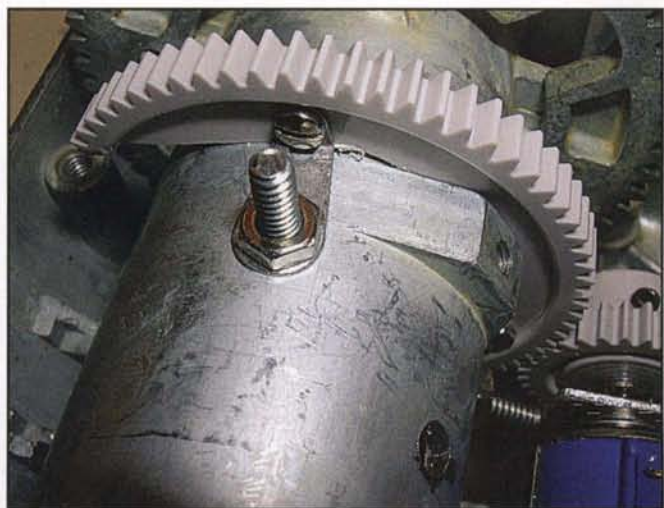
A close-up showing how the gear is secured to the collar and its location between the existing metal gear and the "bump" on the collar. Note the 6-32 flathead screw securing all to the collar. Your unit won't have the threaded hole in the "bump." I tried unsuccessfully to mount the new gear using a bracket there. The method shown works fine!
